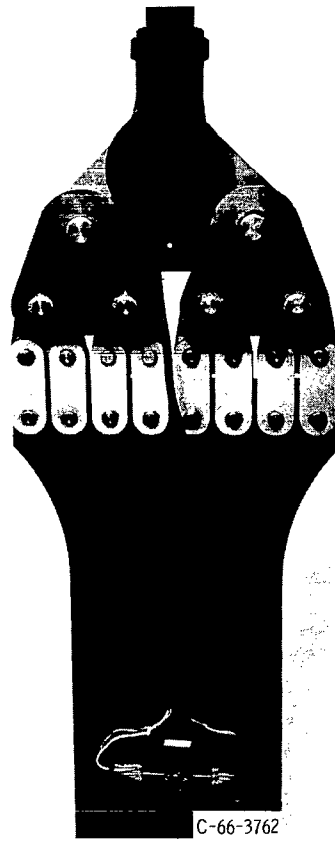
Fracture specimen installed in whiffletree linkage for uniform loading.
